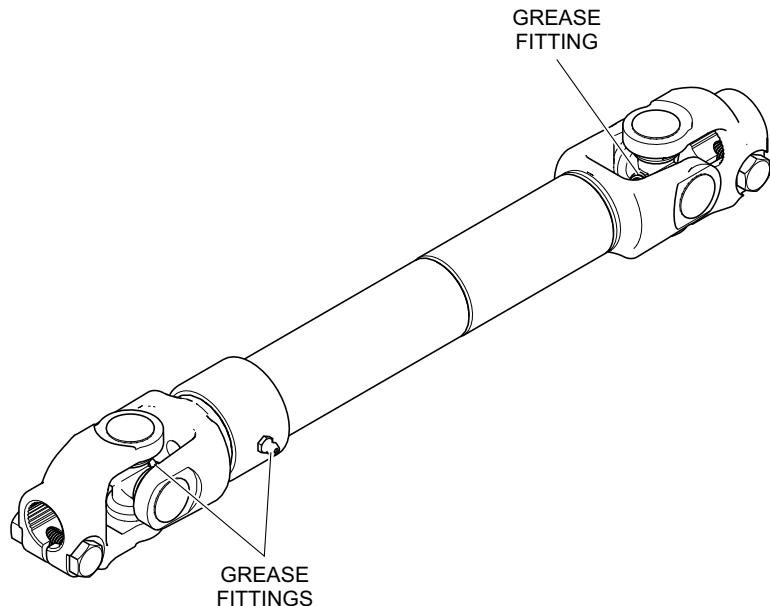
Steering Driveshaft Spline Backlash Inspection
